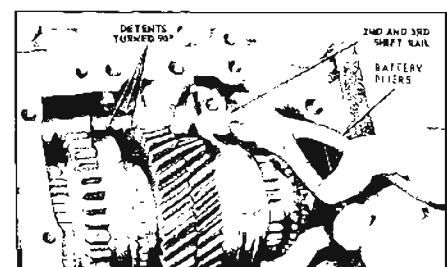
Rotating 2nd - 3rd Shift Rail
